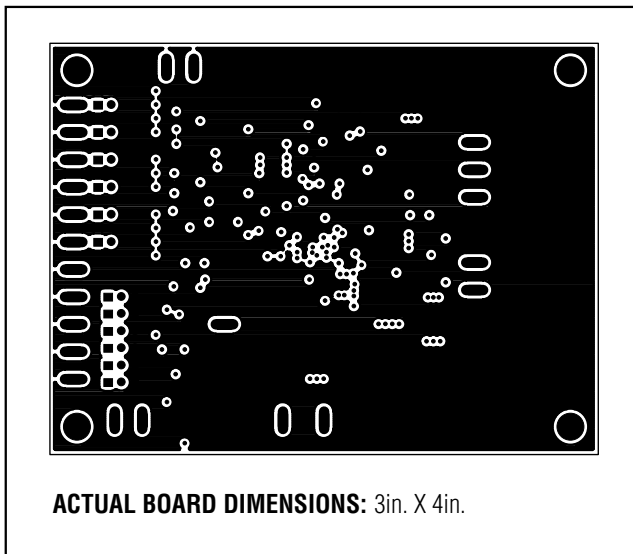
MAX1802 EV Kit PC Board Layout—GND Layer 2
